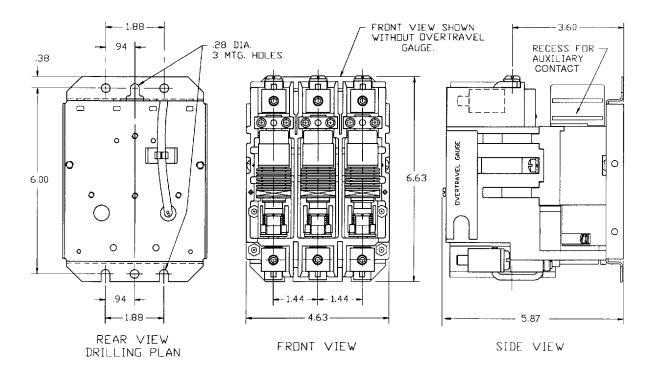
Dimensional Drawing (Inches), Class 8502 Type WFO
